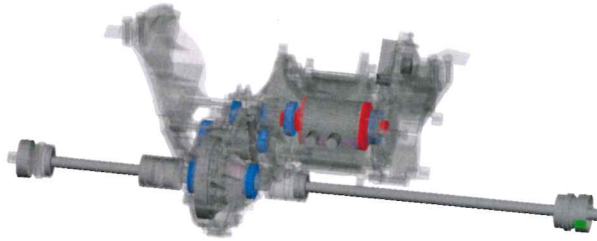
Drive train model with housing parts and support arms as one part elastic body, elastic shaft components, gears and bearings.
